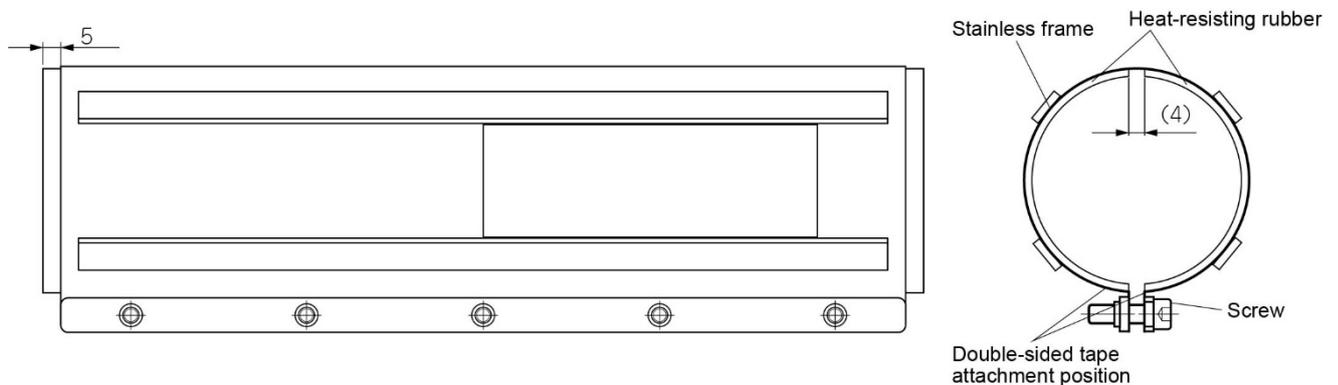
Position for mounting the heat-resisting rubber on the stainless frame (with opening)
